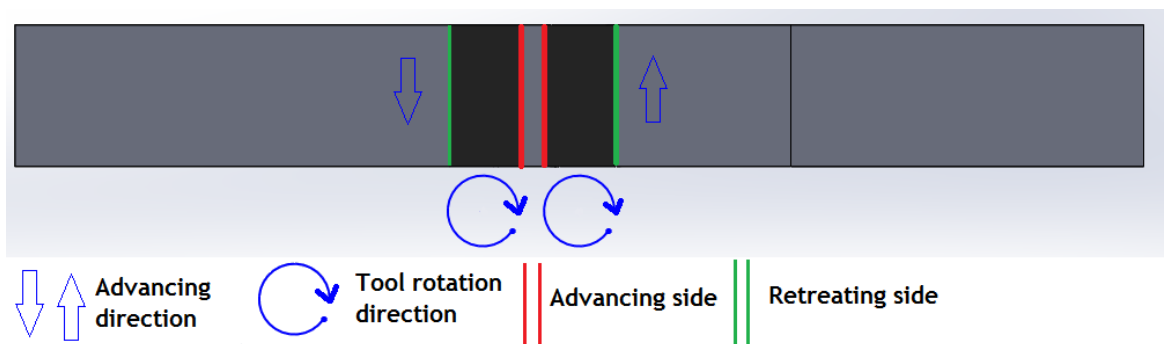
Scheme with illustration of the advancing and retreating side of the weld seam.
